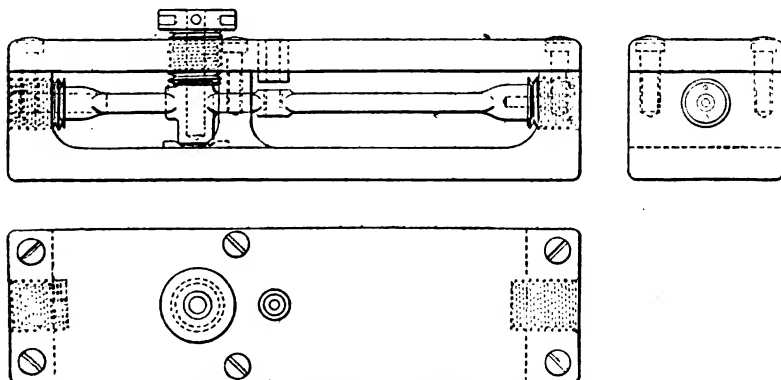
Jig for Drilling Work Shown in Fig. 56
